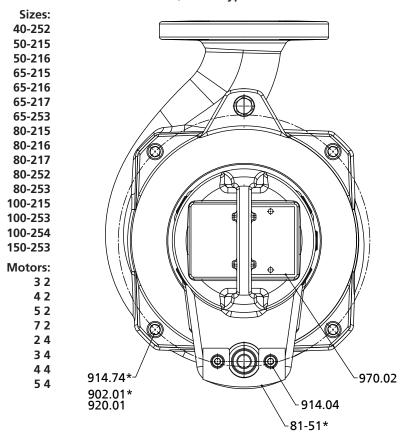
Motor and fastening elements for the cable glands Amarex KRT, motor type 1 *: On specific designs only
